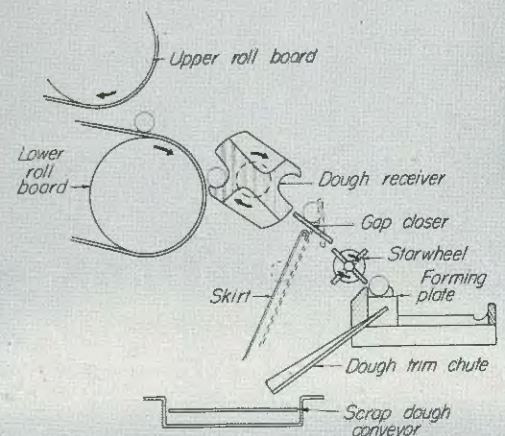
Below—Transfer point where dough rod is fed into tying mechanism. Rejected dough rods and end trimmings, carried away by scrap conveyor, are put back in extruder
